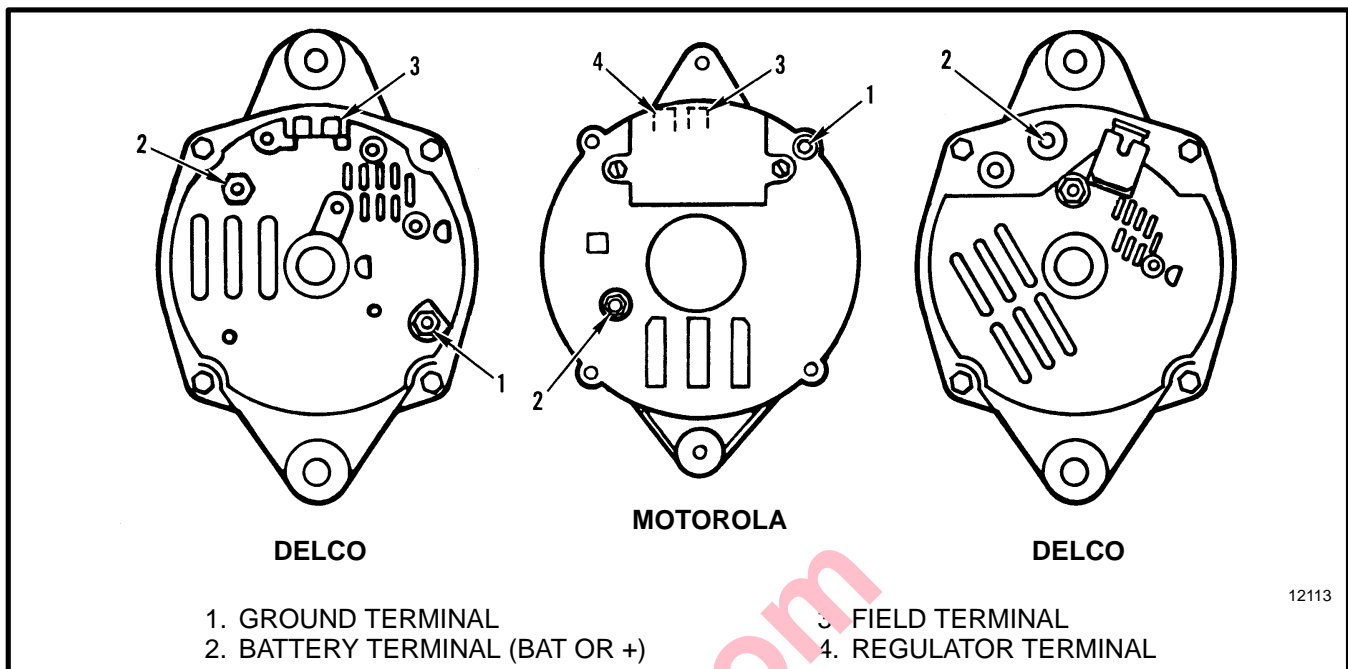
TYPE A ALTERNATORS, REAR VIEWS
